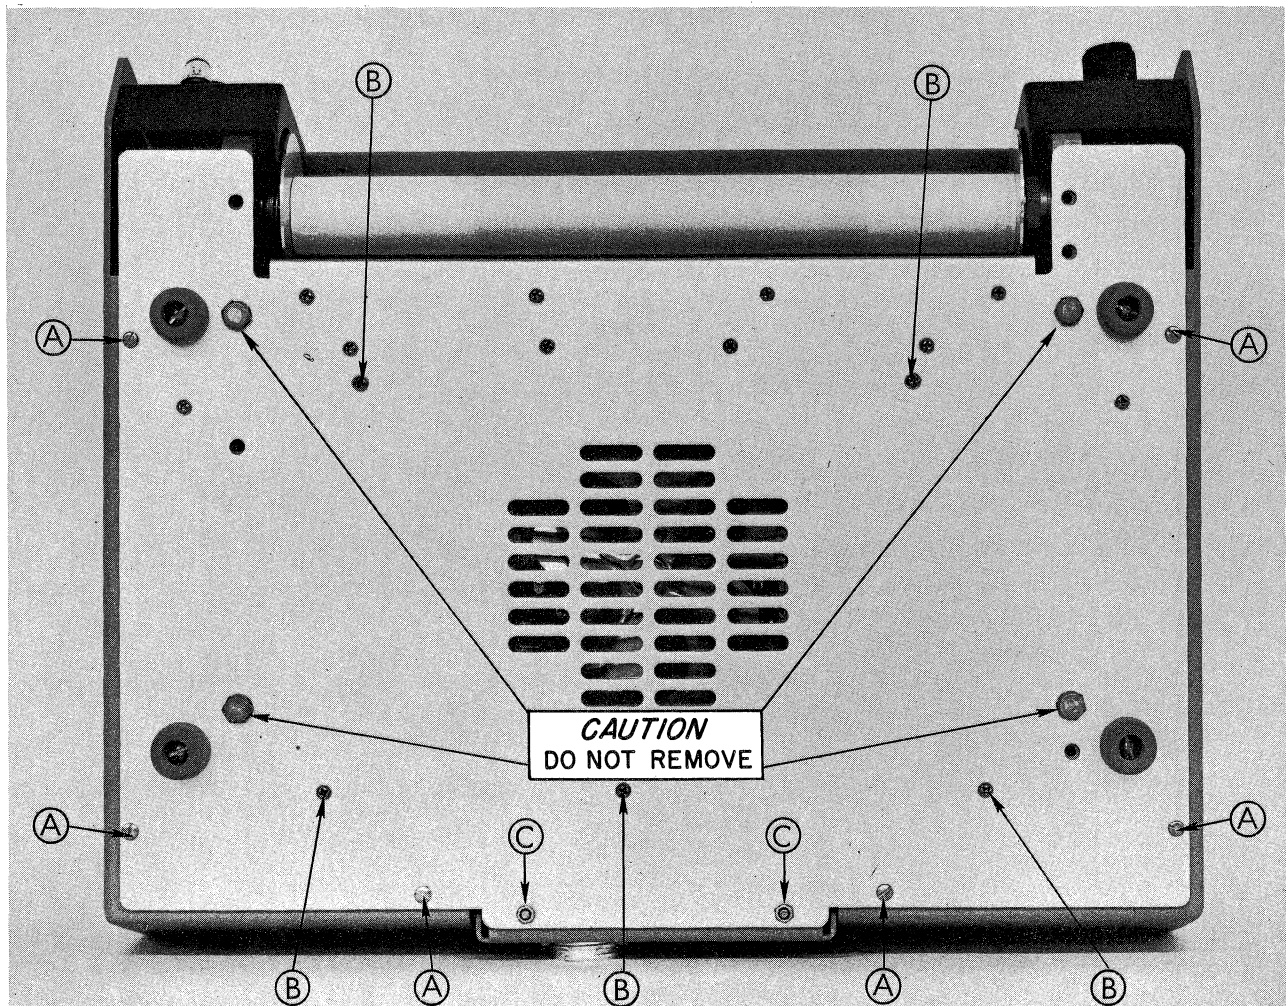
Location of Cover and Power Supply Mounting Screws
